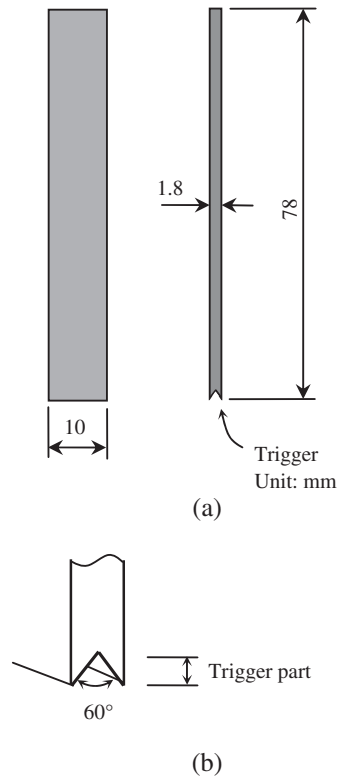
Specimen configuration for progressive crushing test. (a) Dimension and (b) V-shaped trigger geometry at specimen tip.
